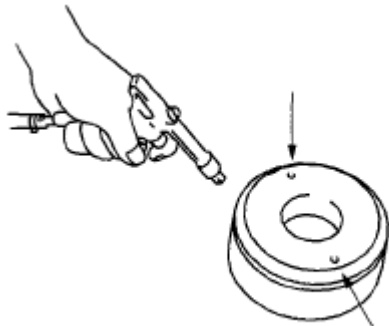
Applying Compressed Air Through Fluid Passage Of 3-4 Clutch Drum
